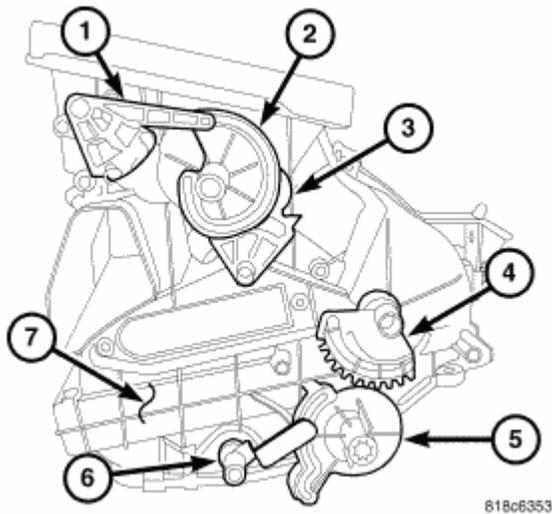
Removing/Installing Defrost Door Lever/Gear Assembly, Mode Door Cam, Panel Door Gear, Blend Door Gear, Blend Door Lever And Blend Door Cam From Driver Side Of Air Distribution Housing
